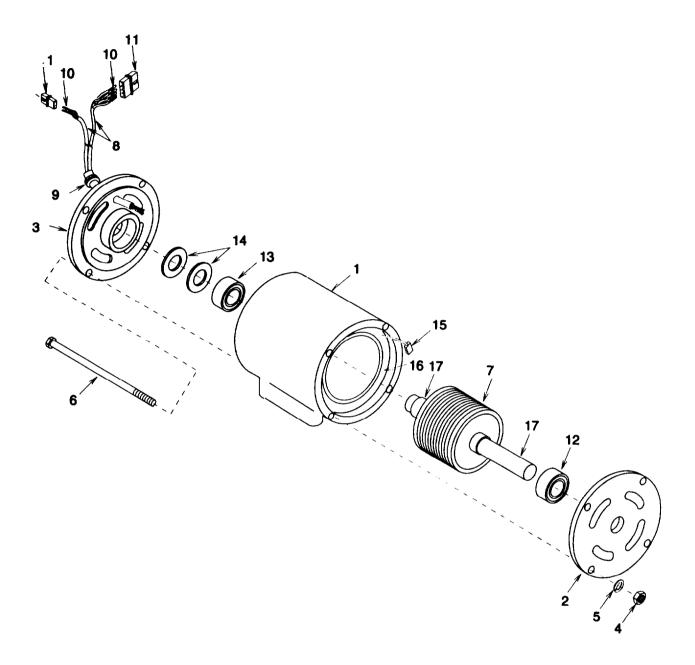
Evaporator Fan Motors (B3 & B4)
